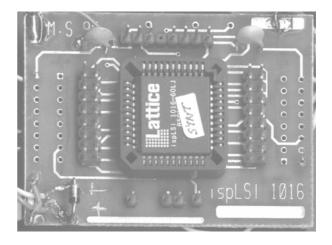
PC board of realized synthesizer. PC board size: 60 x 45 mm
